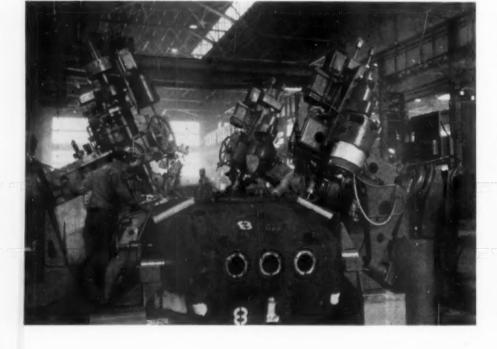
Slope sheets on a tank hull are drilled for suspension bracket bolt holes by a multiple-head drilling machine.
